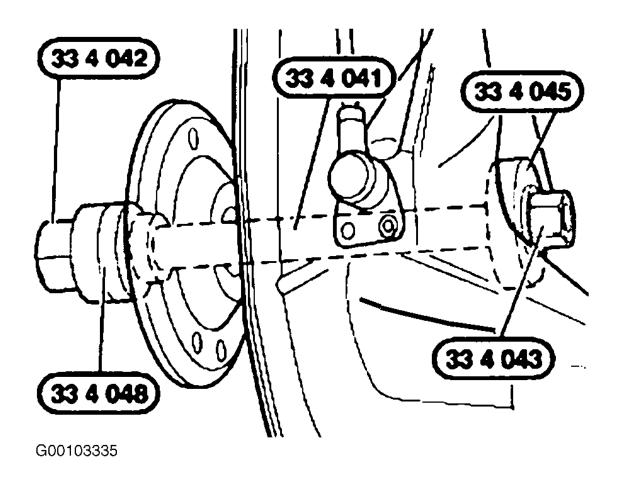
Pulling In Drive Flange Courtesy of BMW OF NORTH AMERICA, INC.
